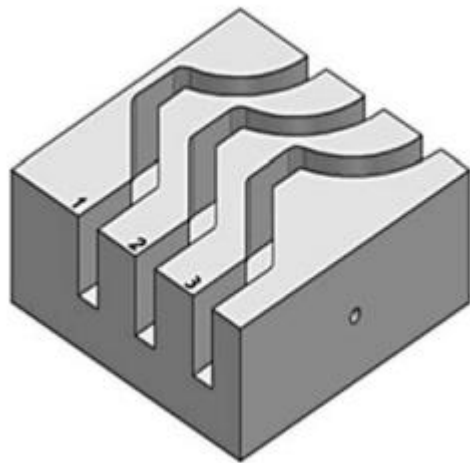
Three-dimensional model of the workpiece and the groove sizes
